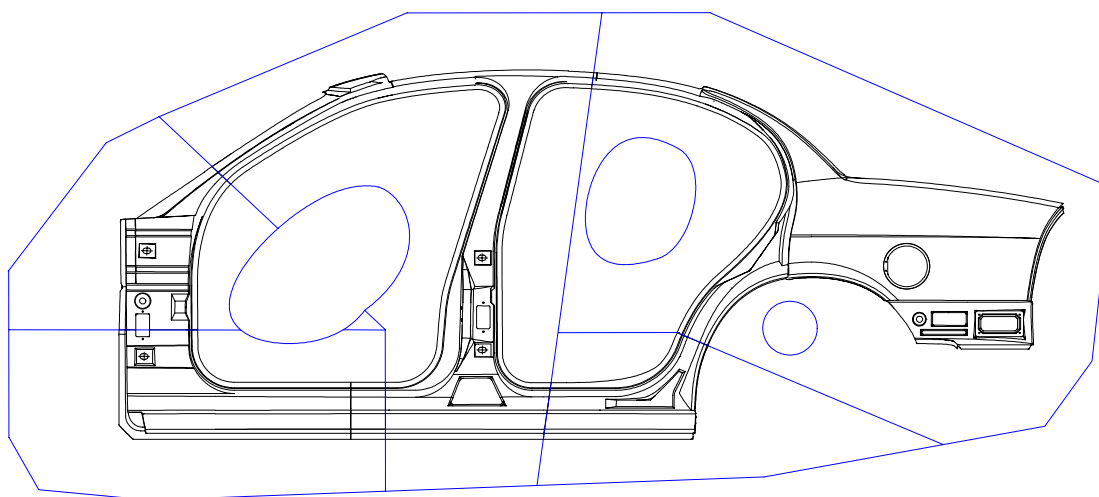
1 For the Economic Analysis cost calculation purposes, the production blank layout for the tailor welded blank parts was developed.
